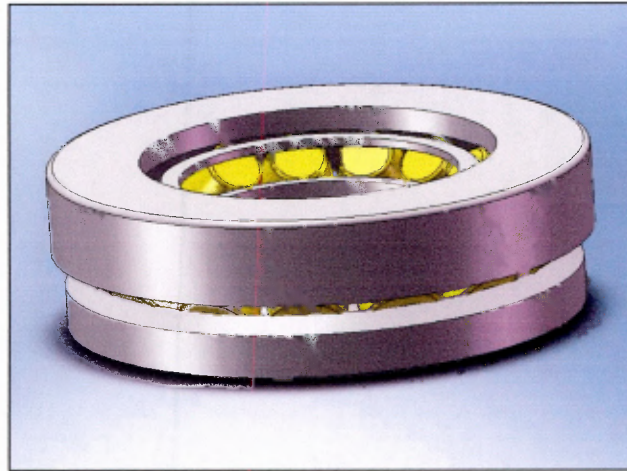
SKF 29412 E Spherical Roller Thrust Bearing
